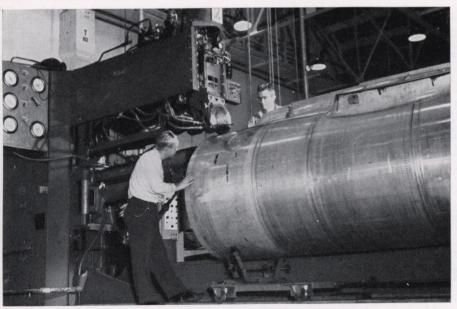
This huge seam welder has a throat 60 inches deep, is used to join sections of large external fuel tank designed for aircraft. This Federal Type FCS 3-60-UG universal gear driven unit greatly extends range of seam-welding process.
